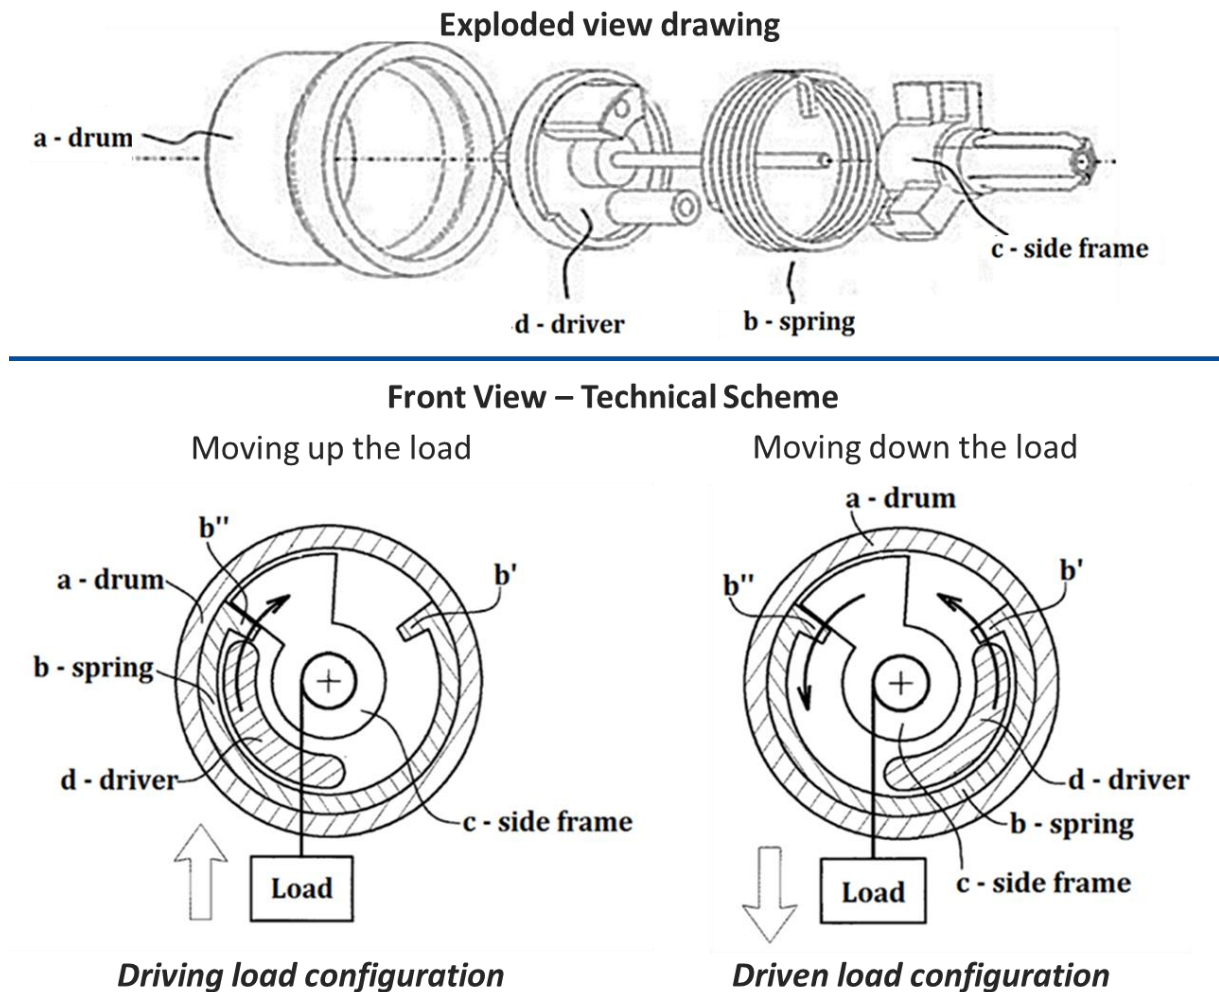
Scheme of the spring-brake system. Upper figure: exploded view of the assembly and identification of the brake components, drum (a), spring (b), side frame (c) and driver (d). Lower figure: technical scheme of the brake system functioning during the rising (moving up) and the driving down (moving down) of the load.
